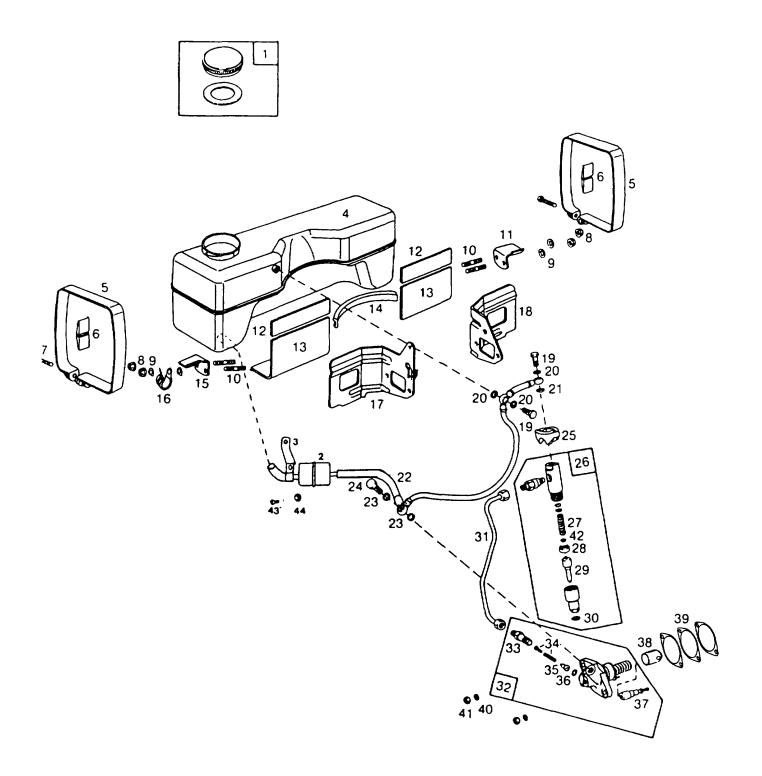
Fuel Tank, Fuel Lines, Fuel Pump and Injector
